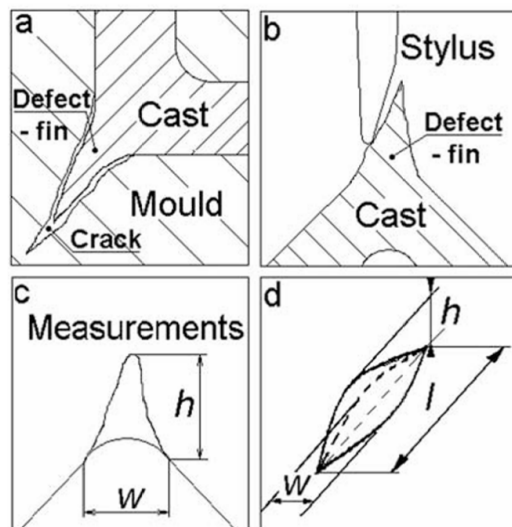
Schematic representation of a) die casting mould crack and the corresponding casting defect, b) measurement stylus, c) shape and size of defect cross – section, d) schematic presentation of defect: depth – h , width – w and length – l
